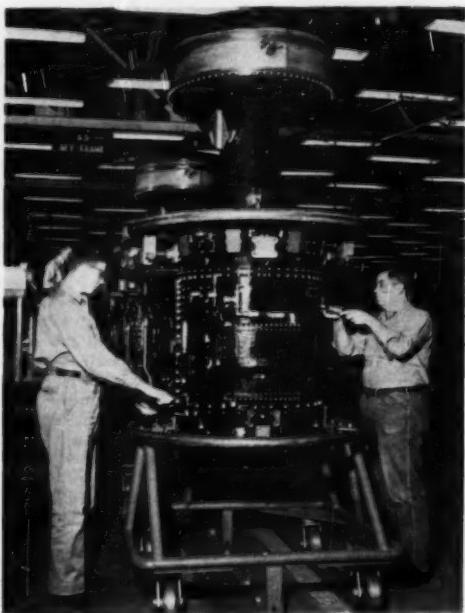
DURING EARLY STAGES OF TURBOJET ASSEMBLY, WORKMEN ARE SHOWN TIGHTENING COMPRESSOR CASING BOLTS
